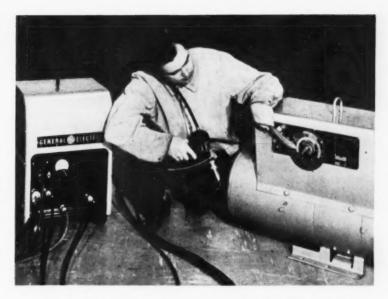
General Electric "Fillerarc" welding equipment consisting of wire driving unit, welding gun, and special self-regulating welder
